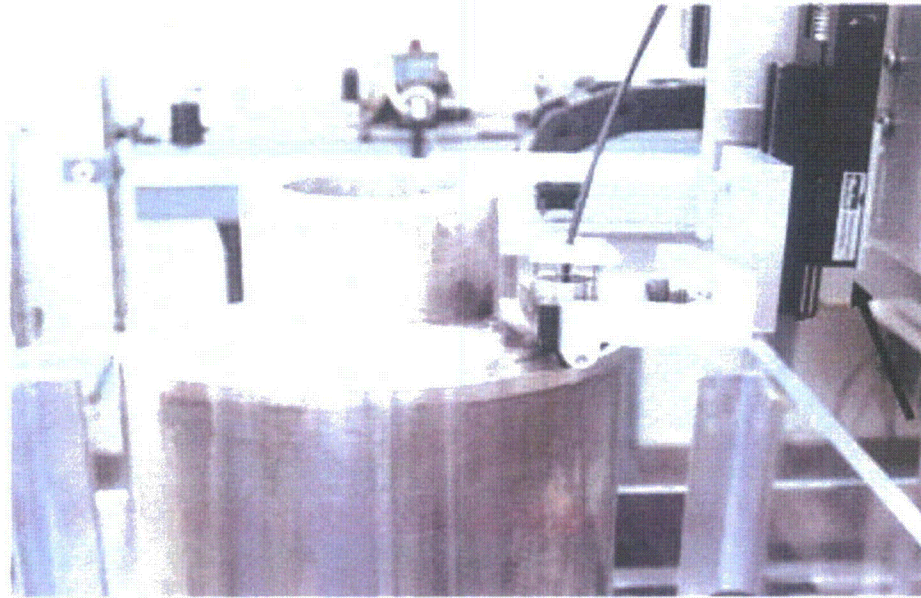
Spring-Loaded Slide Assists in Holding the Probe on the Specimen
